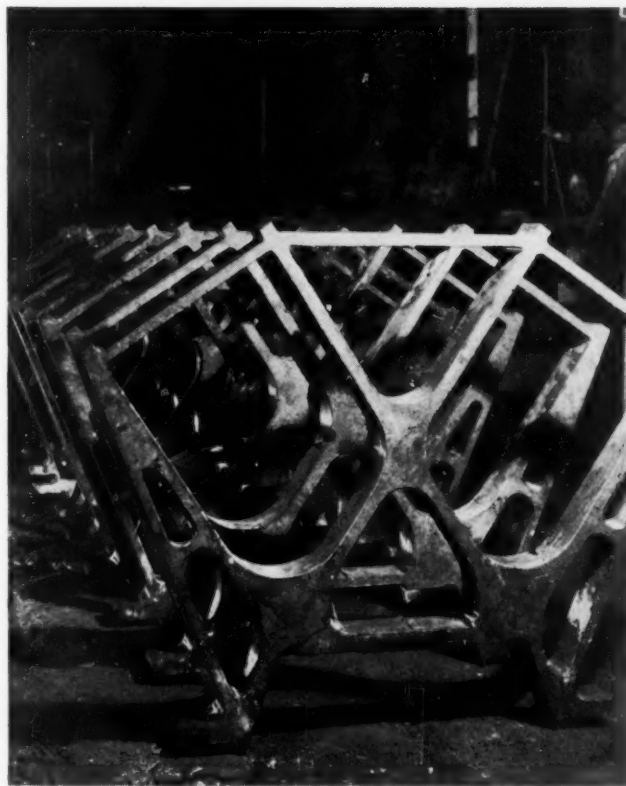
MAIN-FRAME MEMBERS FOR A 1200-HP DIESEL ENGINE
